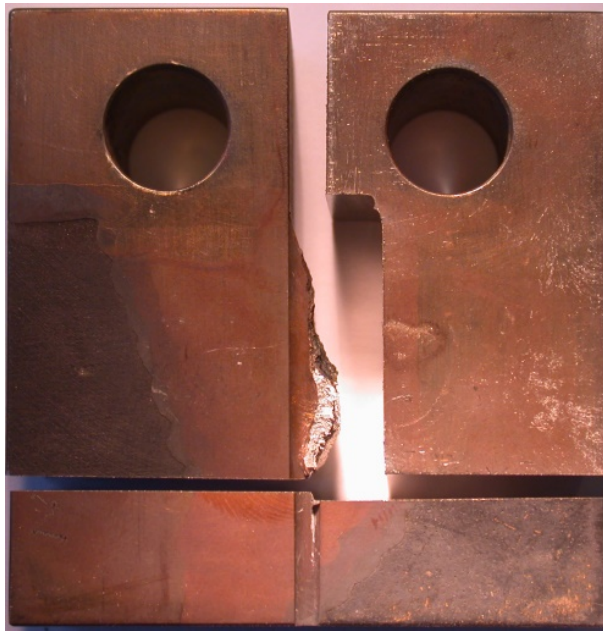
Alloy 152 specimen N152-TS-1 after testing in simulated PWR environment. The fracture surface from one side was removed for further examination in the SEM.
